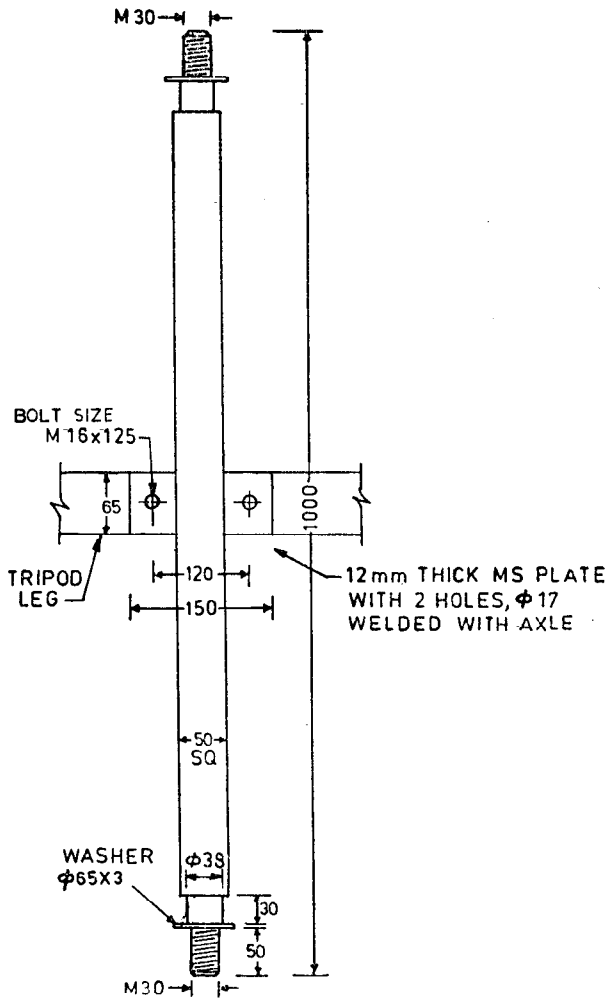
DETAILS OF HOISTING EQUIPMENT TYPE A
